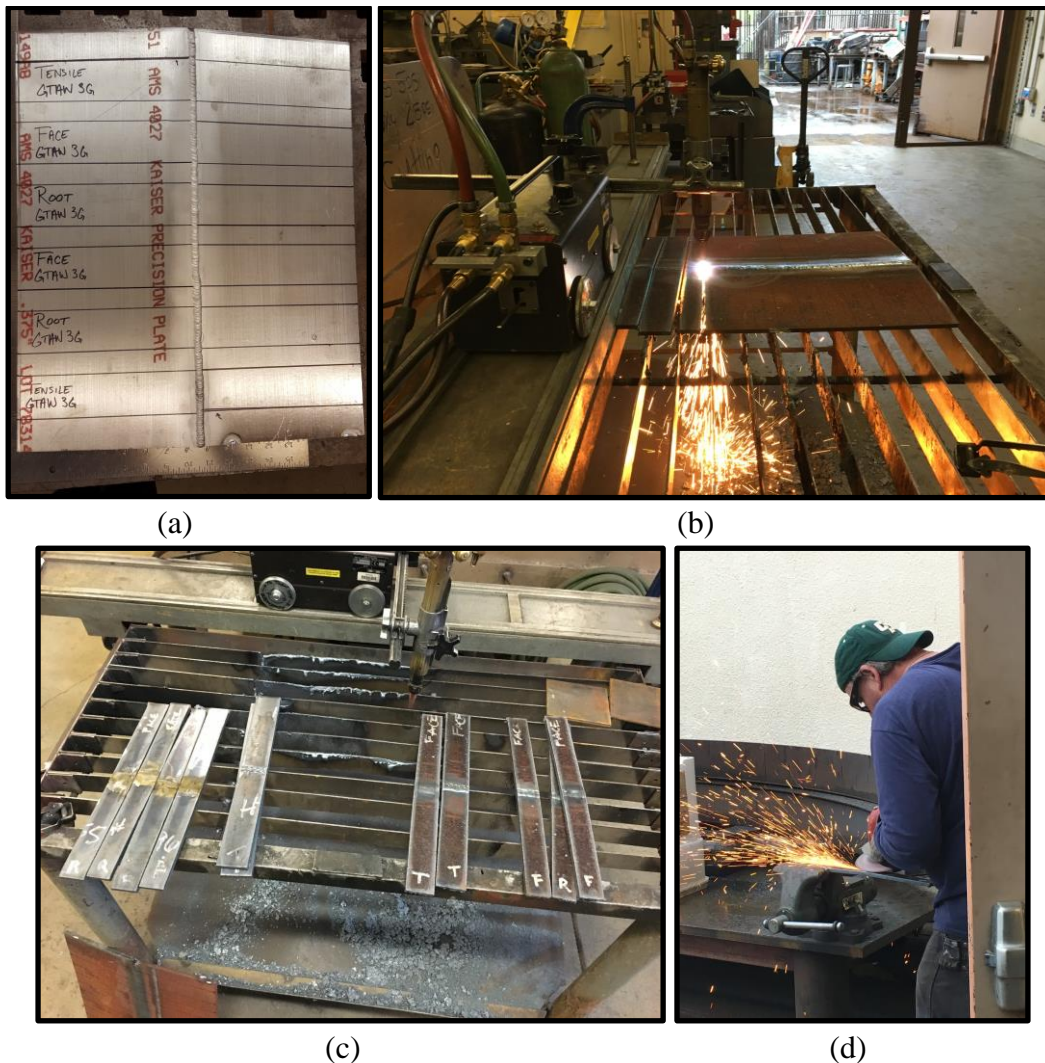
a) The plates were marked into test specimens according to AWS D1.1 and b) the sections were flame cut from the plates. c) The specimens were separated by test and d) the weld beads were ground flush using a grinding saw.
